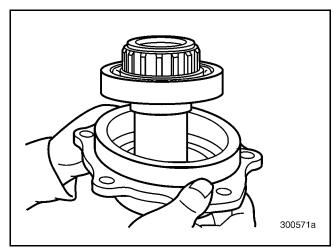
Removing Main Drive Pinion Shaft and Bearing from Cover
